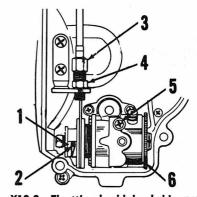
Throttle should be held open during bleeding to speed the operation.
